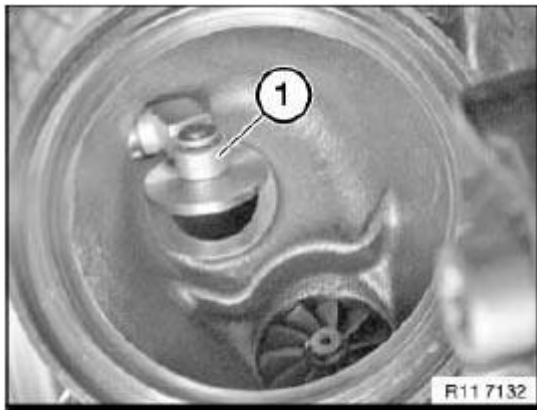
Identifying Flap Of Vacuum Unit (Wastegate Valve)
